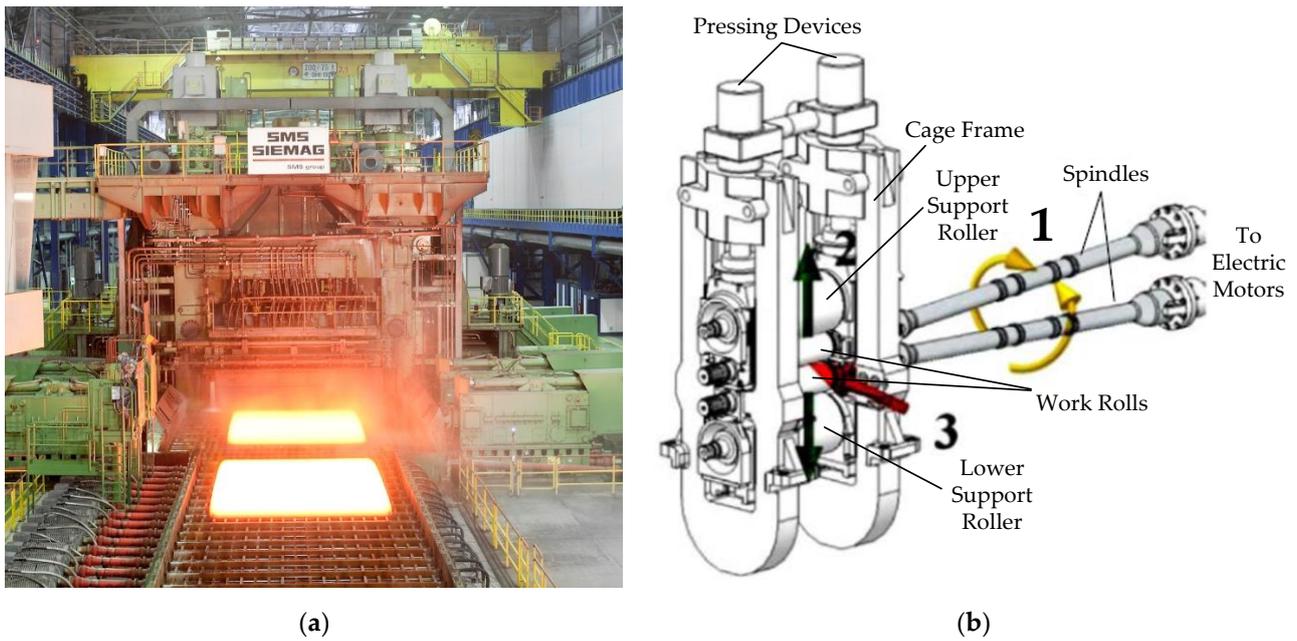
(a) Movement of workpieces along the roller conveyor at the Mill 5000 (b) stand exit and force impacts on the stand equipment.
